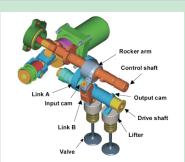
Mechanical valve train system of the VVEL (from the paper 'New PM Parts for VVEL (Variable Valve Event and Lift System)', K Kawase, Diamet Corp., Japan. Courtesy EPMA)
